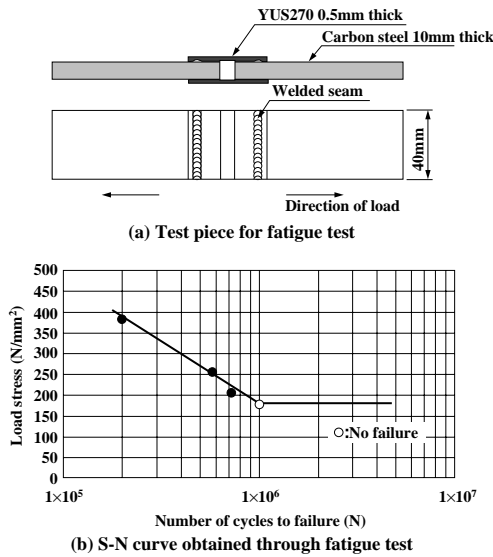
Fatigue test of welded joints by indirect seam welding
